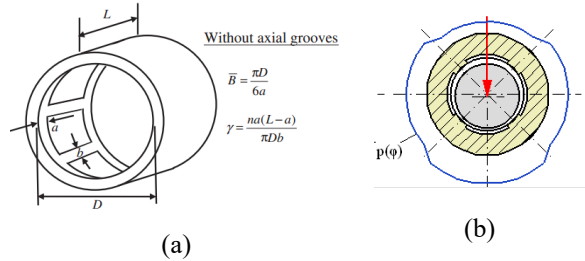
(a) Hydrostatic bearing structure diagram without oil drainage; (b) Load diagram of hydrostatic bearing with 4 oil recess
